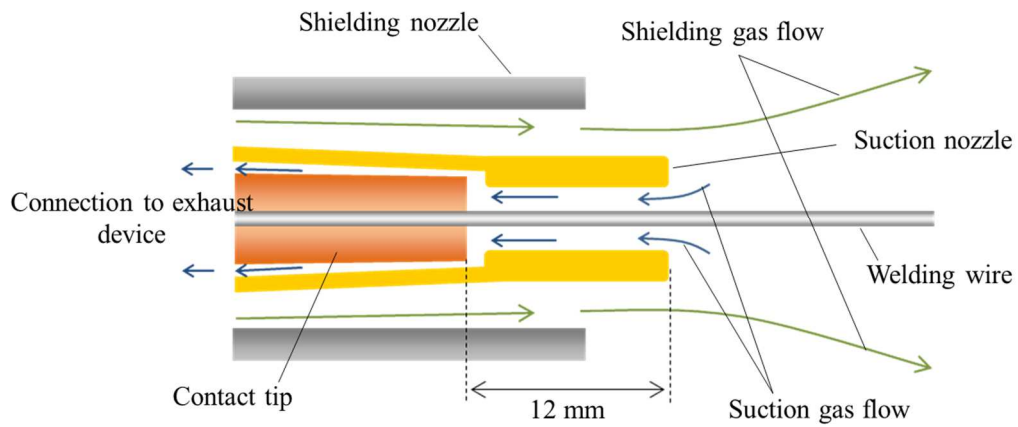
Schematic illustration of developed welding torch structure and dimension (Longitudinal section)
